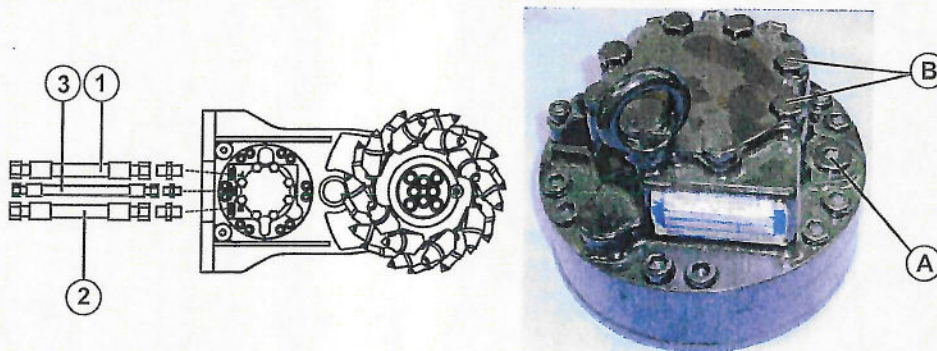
Pressure, drain and return lines; Purge and Hexagonal screws
